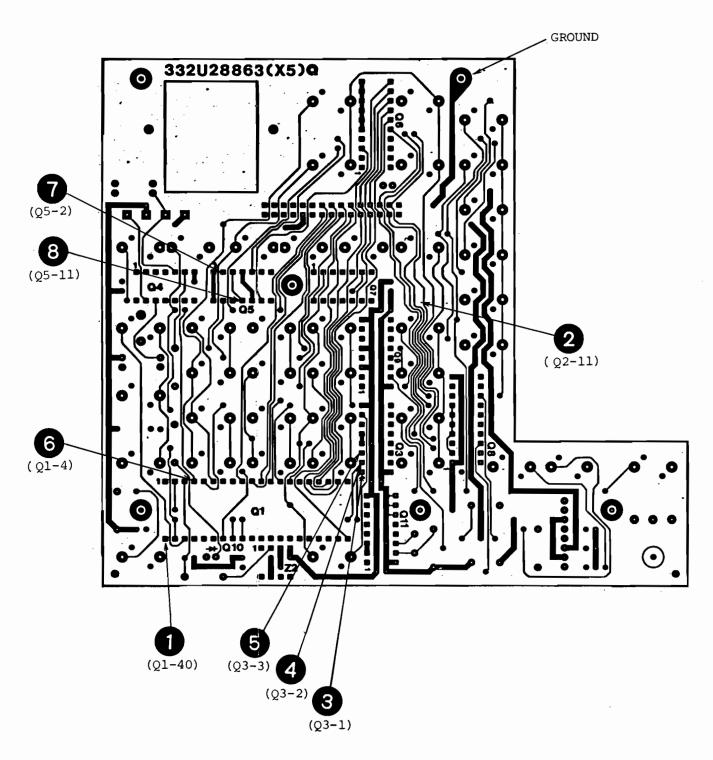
(a) A5 FRONT BOARD PC Board
